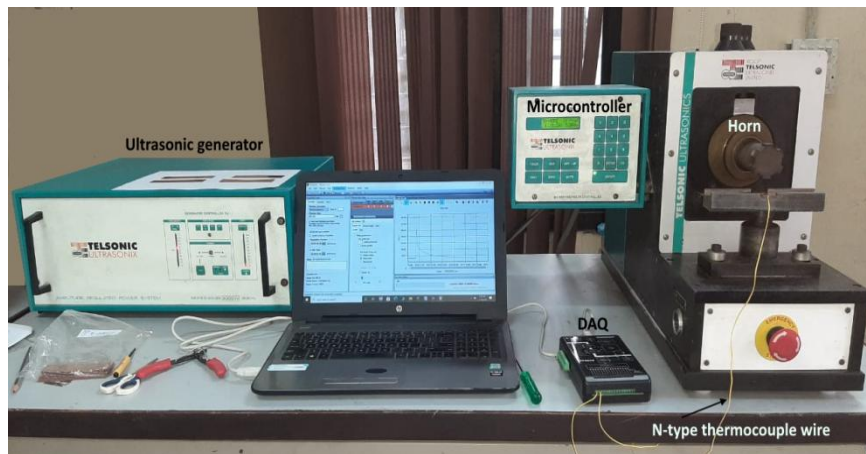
Ultrasonic Spot Metal Welding Set-up
